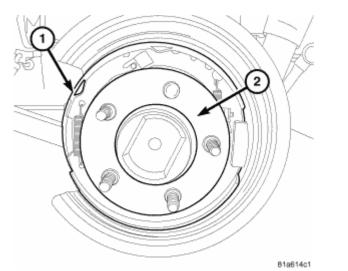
Identifying Rear Park Brake Shoes & Axle Shaft Courtesy of CHRYSLER LLC
